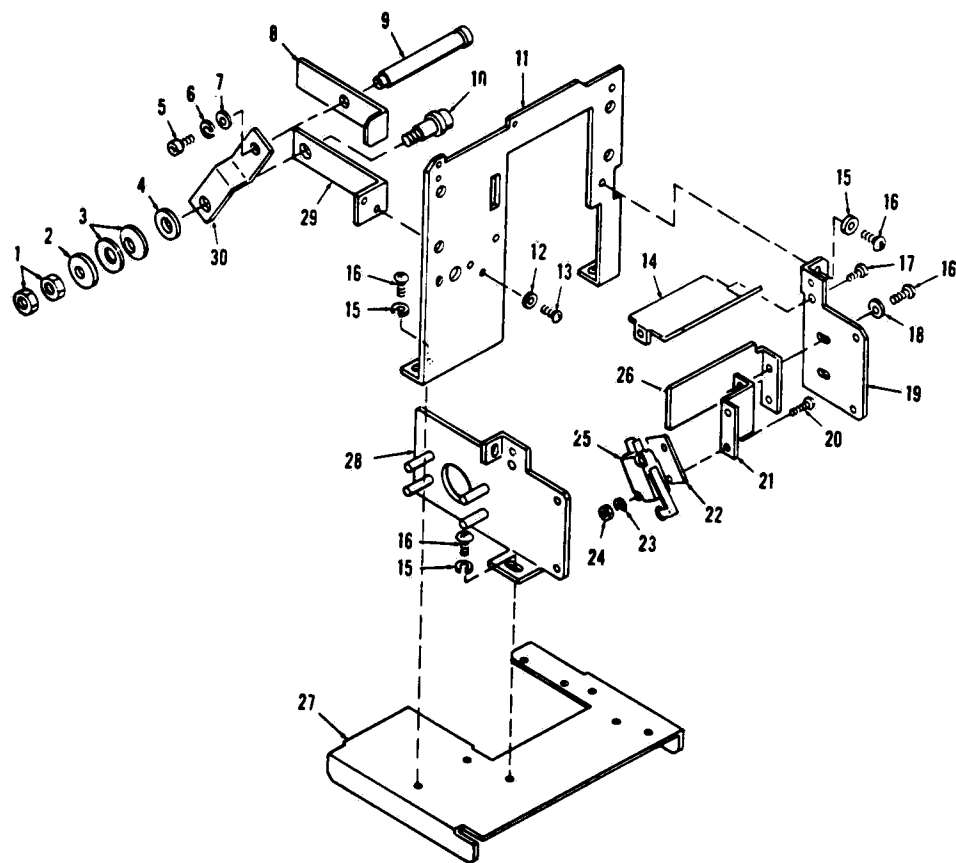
PRINTER FRAME ASSEMBLY (Part 2 of 2).
